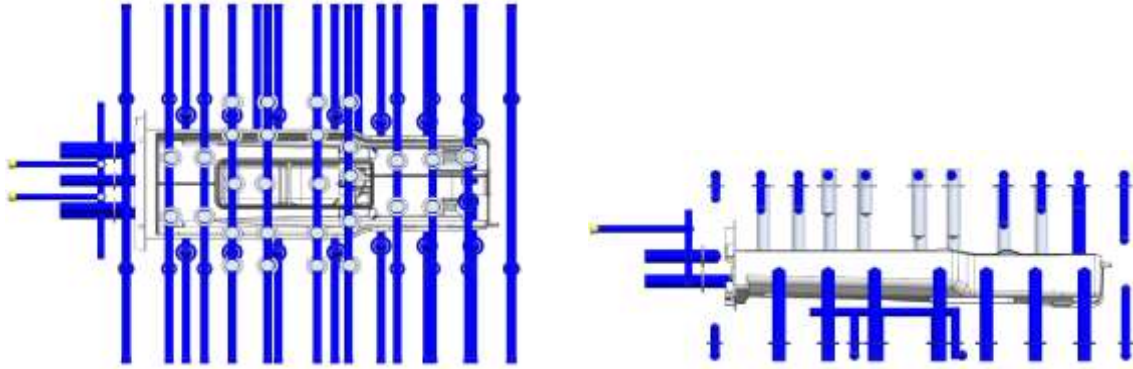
Already Existing Cooling Channels of Titan Big- Drawer Part
